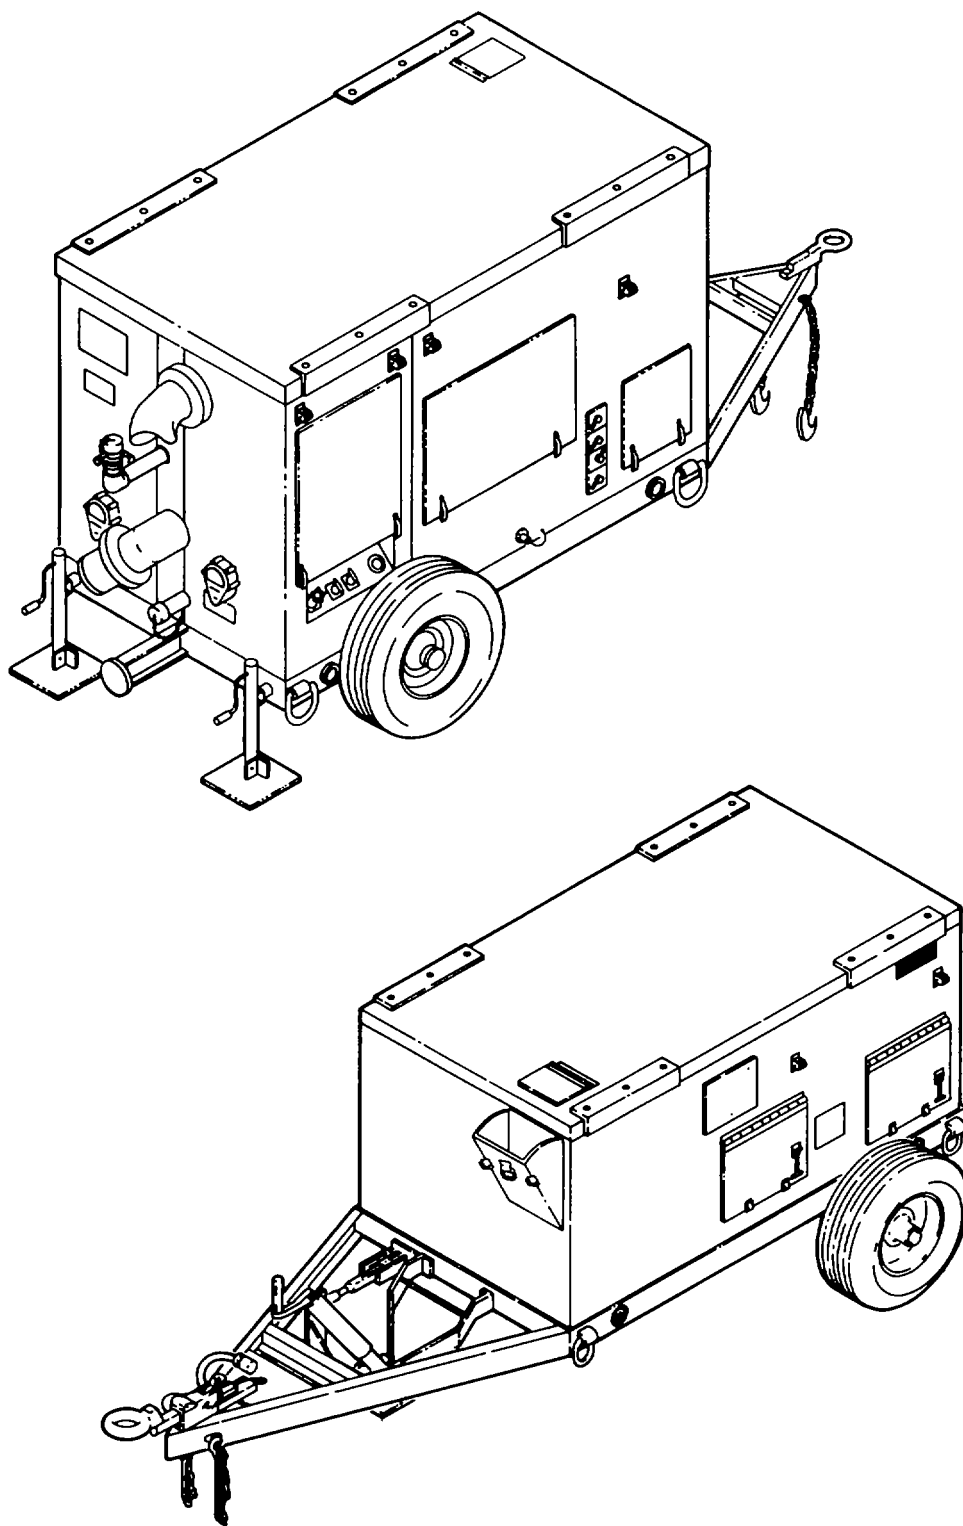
Full External View of Pumping Assembly, Water, 600 GPM, Trailer Mounted
